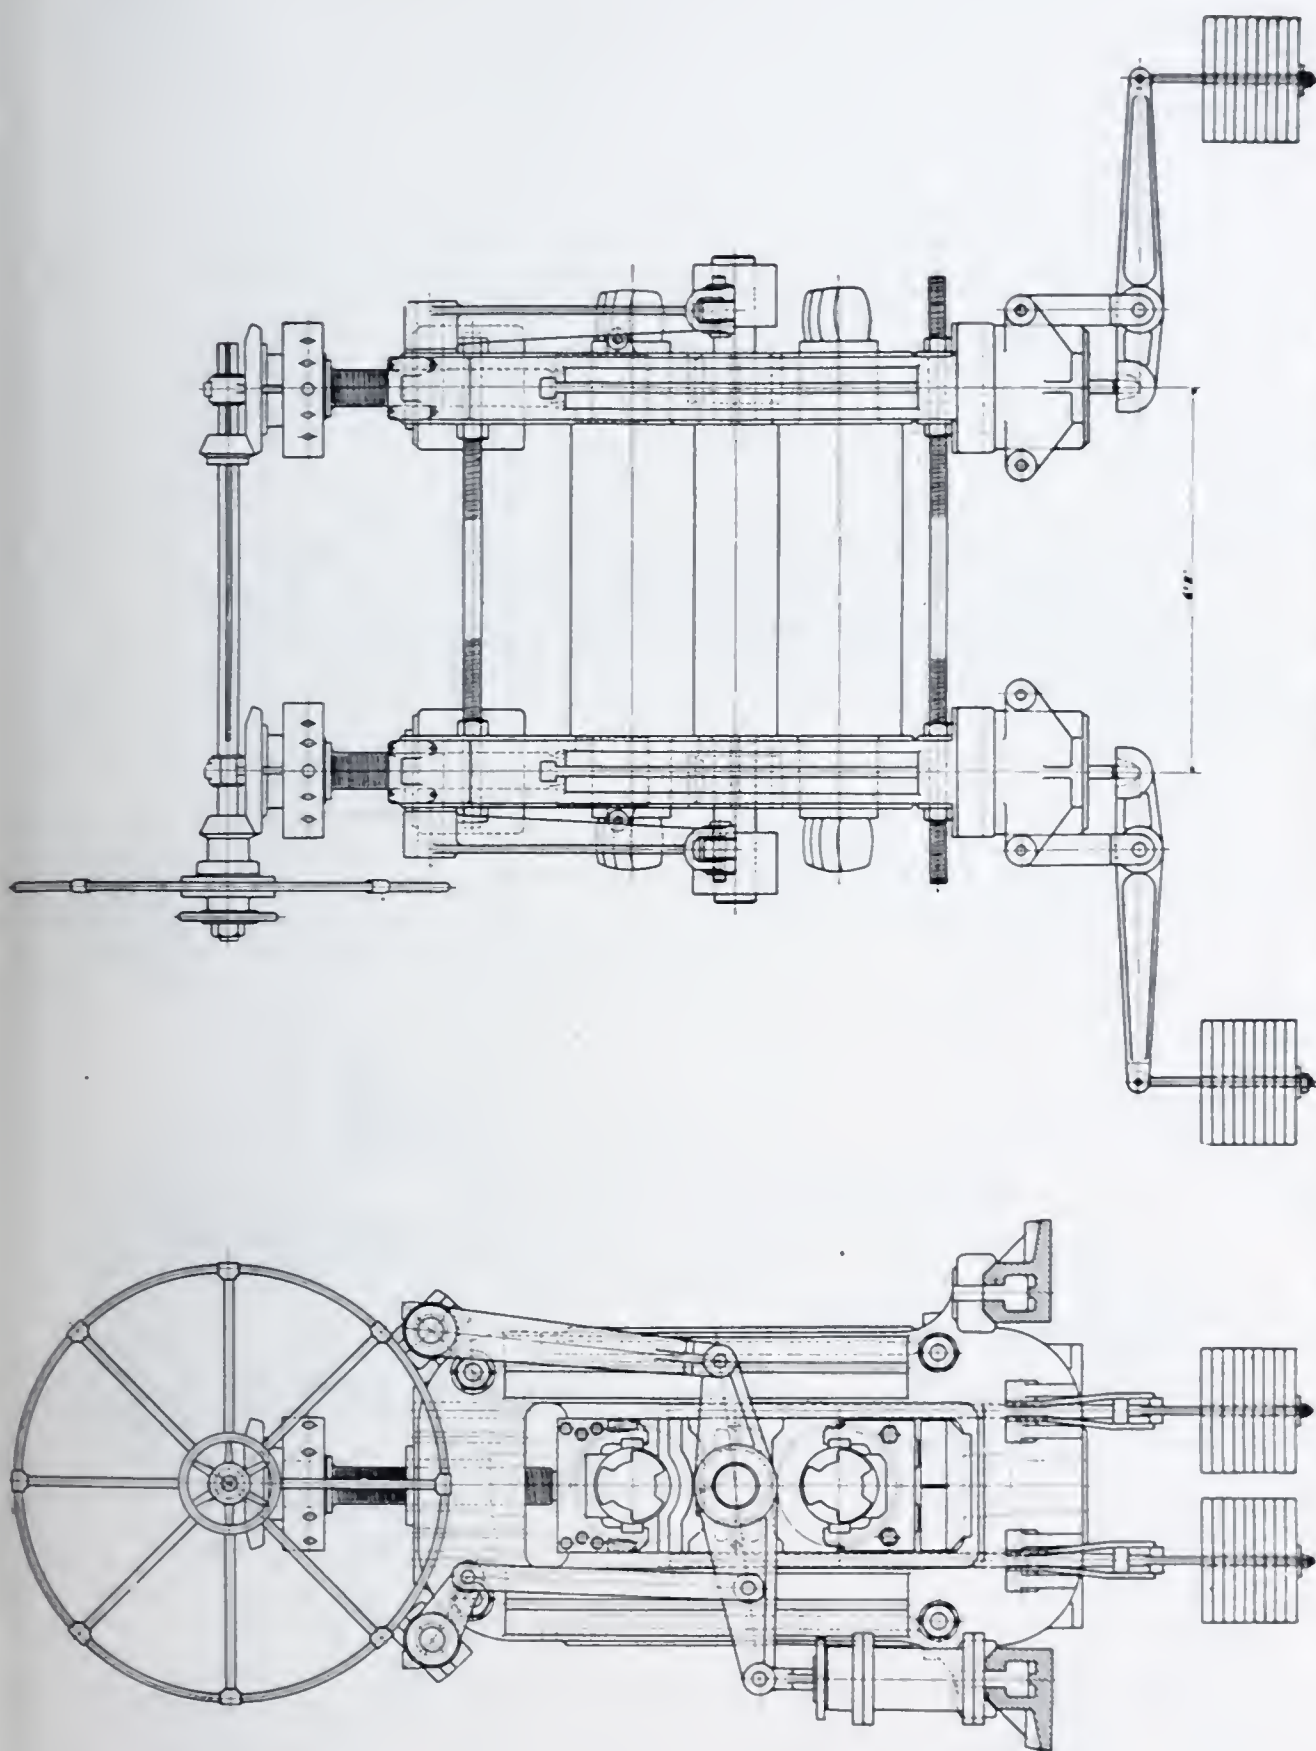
Arrangement of 24-Inch, Two-High Balanced Sheet Mill.
